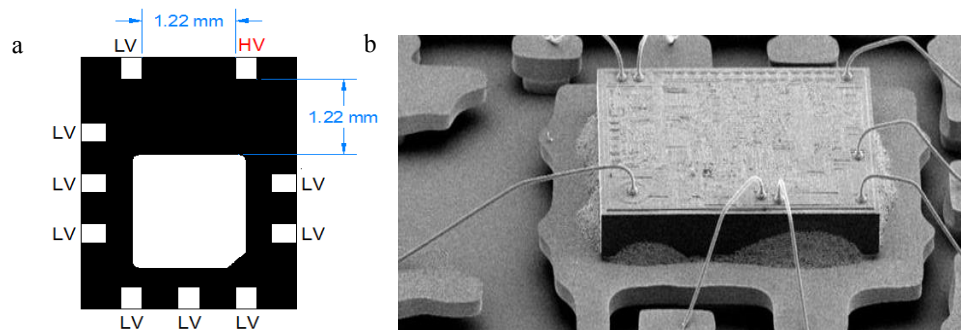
(a) Bottom view of HV package outline; (b) SEM image of bonded device
